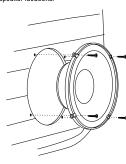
Mounting the GT0626, GT06526, GT0636 or GT06536 using the supplied grilles.
